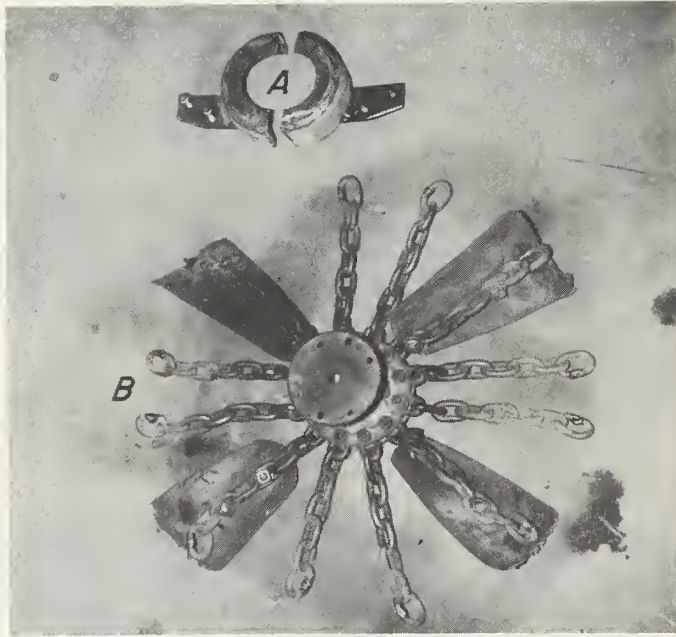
A, Vine and brush guard for flail drive shaft; B, flailing attachment with flaps in place (flaps have had about 100 hours' use)
